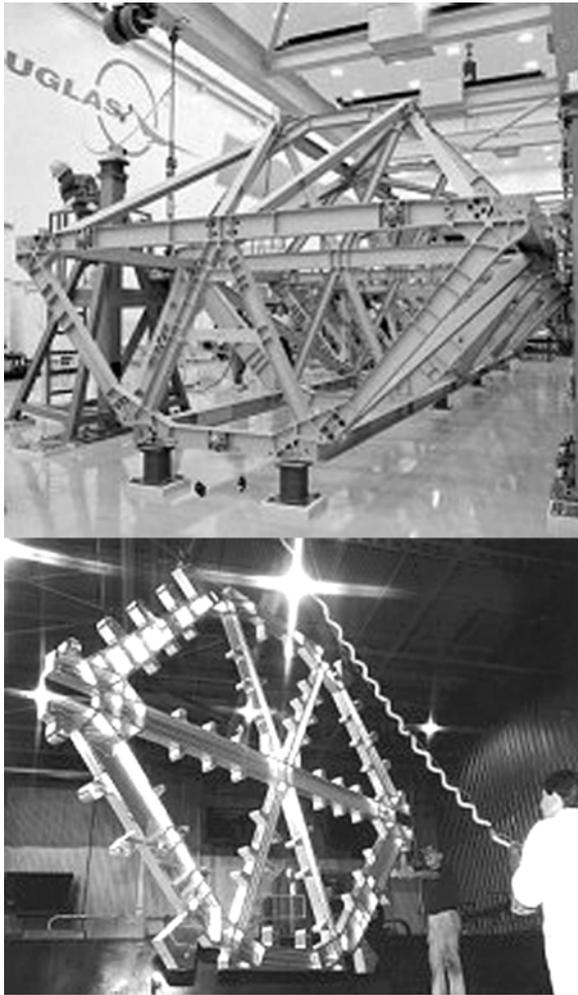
International space station. (a) General view showing trussed spine made of aluminum. (b) Detail showing one transversal bulkhead of the space station truss machined from one cast aluminum block measuring 3.4 m x 4.3 m, 115 mm thick and weighing 5,450 kg. (Fortner)
